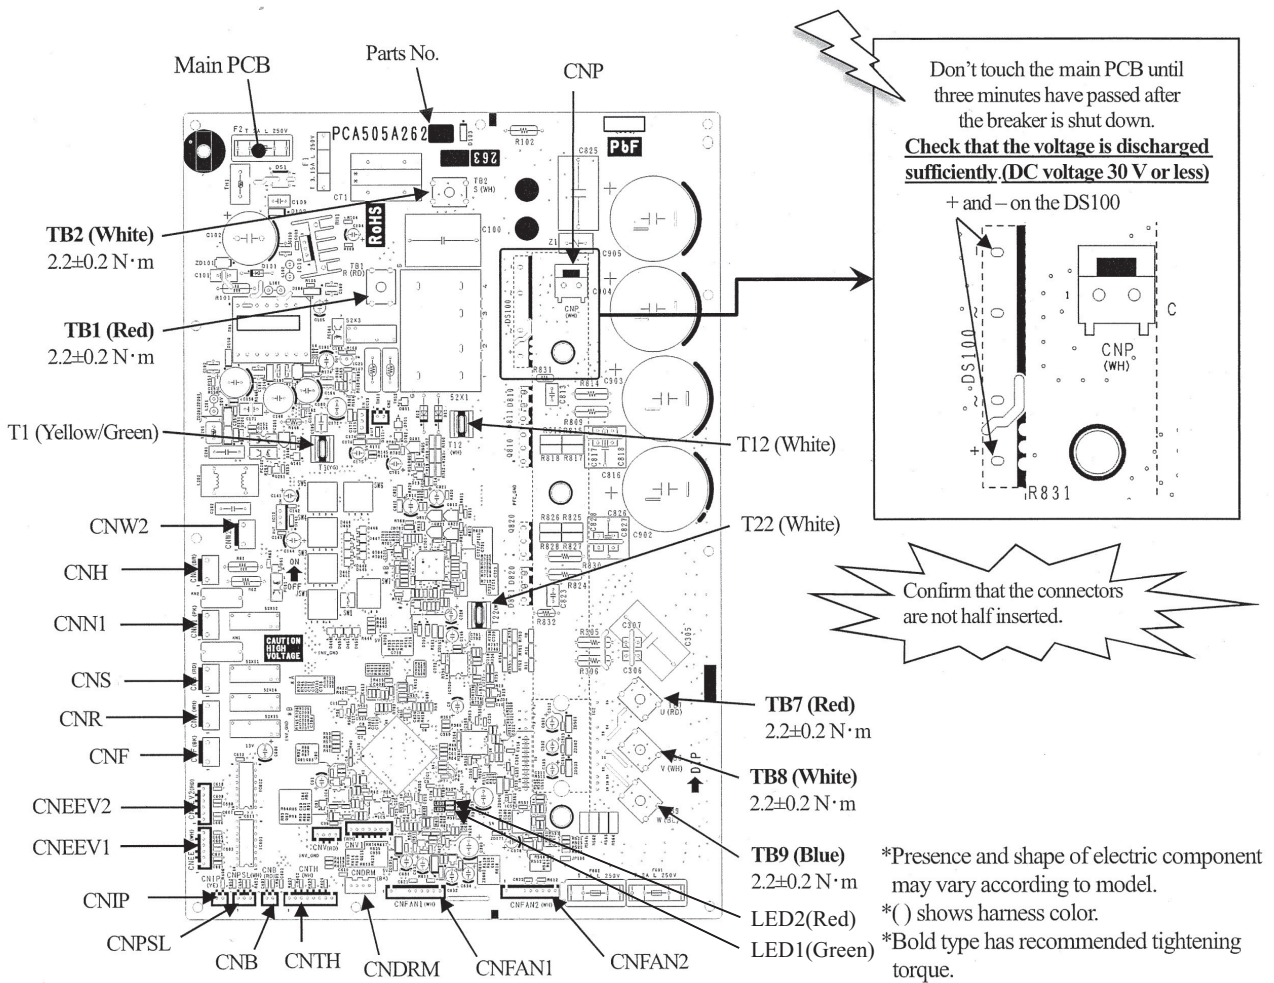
Parts arrangement view of main PCB and voltage measurement points
